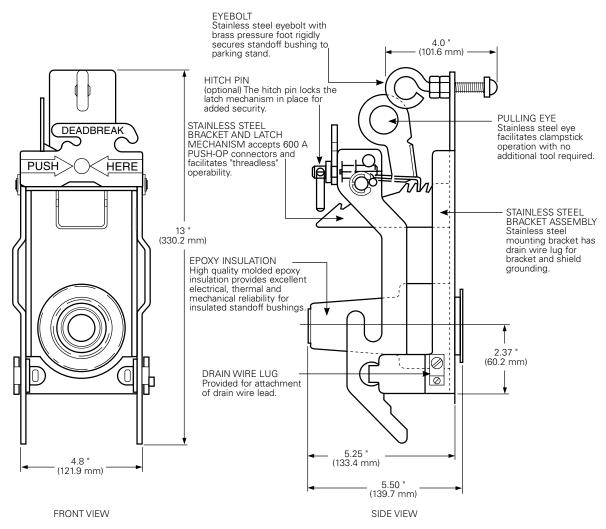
Front view shows standoff bushing and latch mechanism. Side view shows standoff bushing and latch mechanism with bracket assembly.
